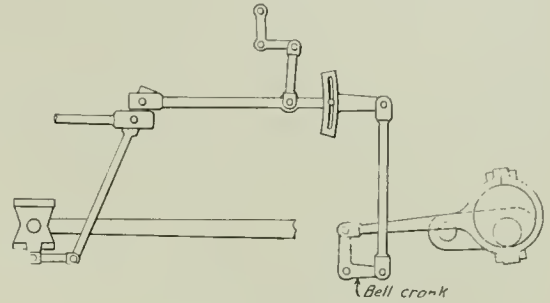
Valve Gear as Applied to P. L. M. 4-8-0 Type
